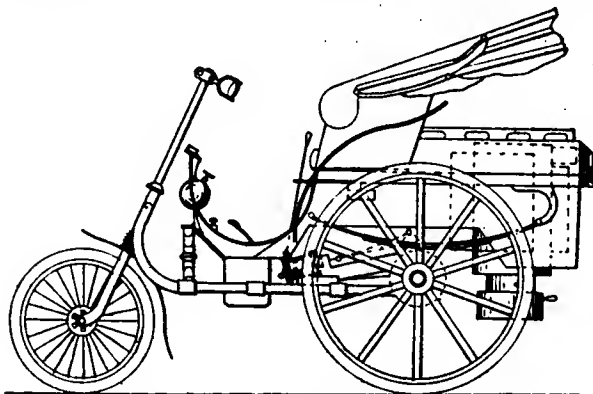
Serpollet Steam Carriage (Latest Type).
